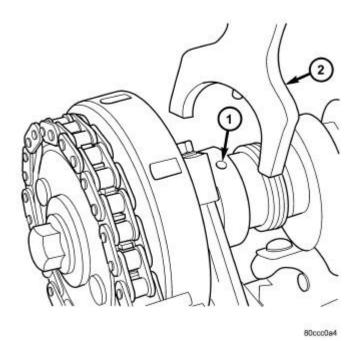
CAMSHAFT DRIVE GEAR REMOVAL/INSTALLATION Courtesy of CHRYSLER LLC
